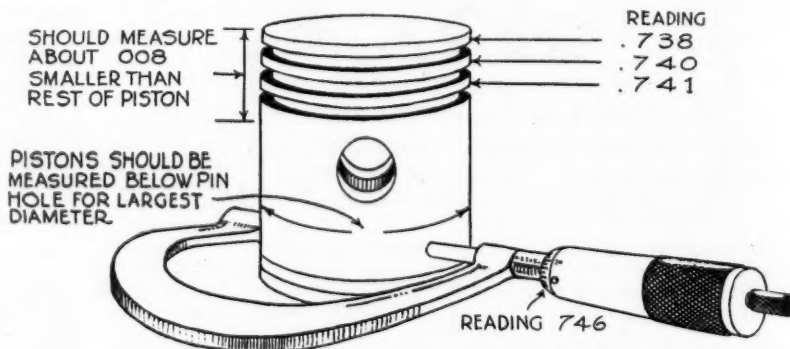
Recommended dimensions of piston to fit an engine of $3\frac{3}{4}$ in. bore. The skirt shows a micrometer reading of 3.746 in. which allows .004 in. clearance to accommodate for expansion due to operating temperature of engine. The top ring land has been reduced to a diameter of 3.738 in., while the second and third lands which are not exposed to such great heat are of greater diameter as shown by the micrometer reading.
